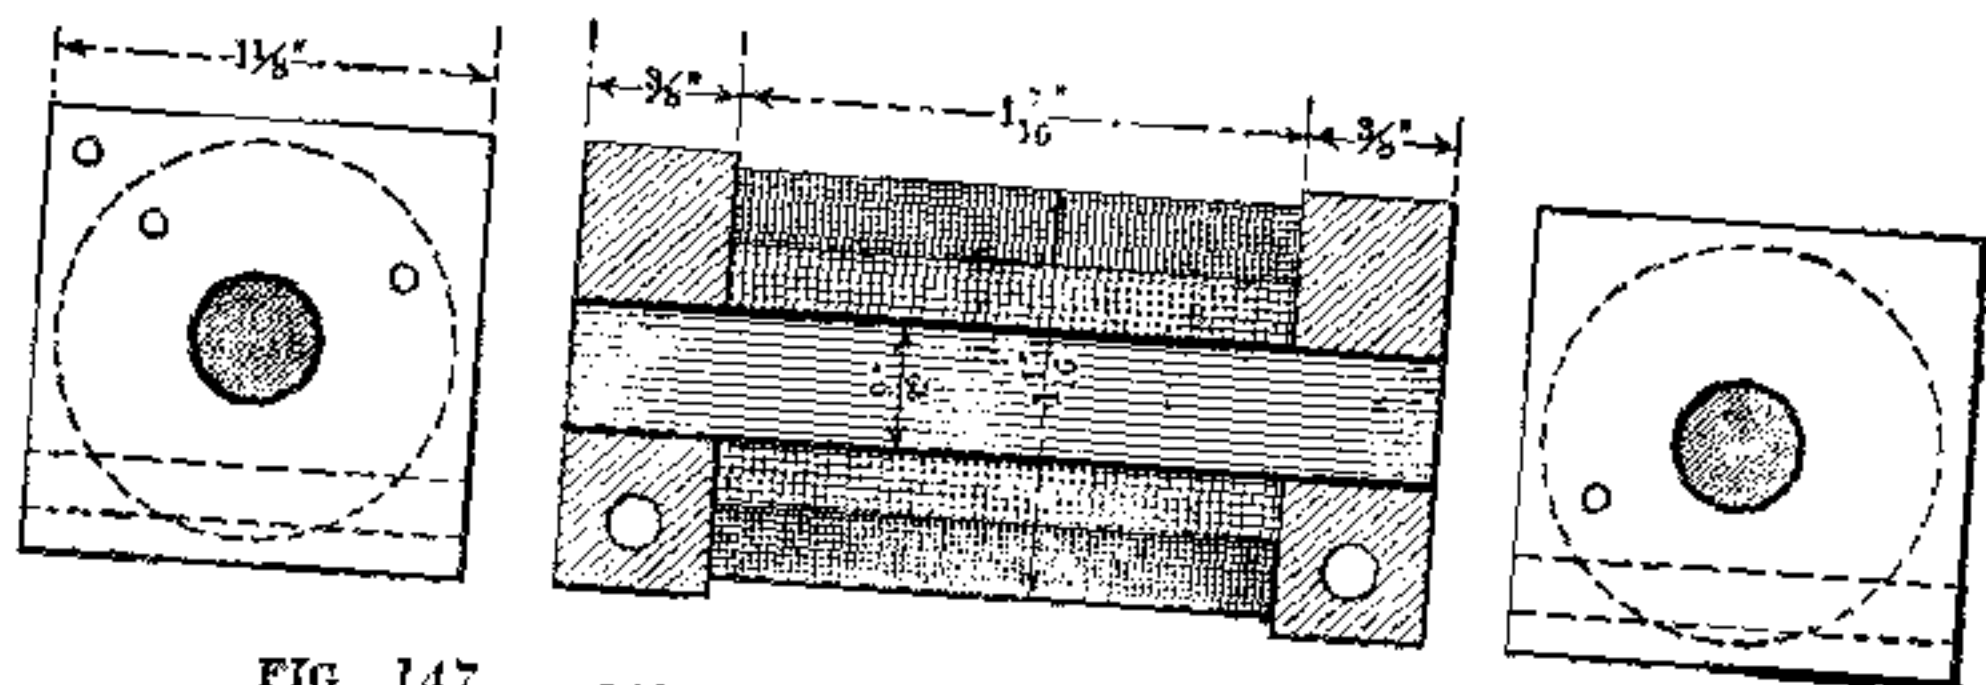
COIL USED WITH BLAKE TRANSMITTER.
